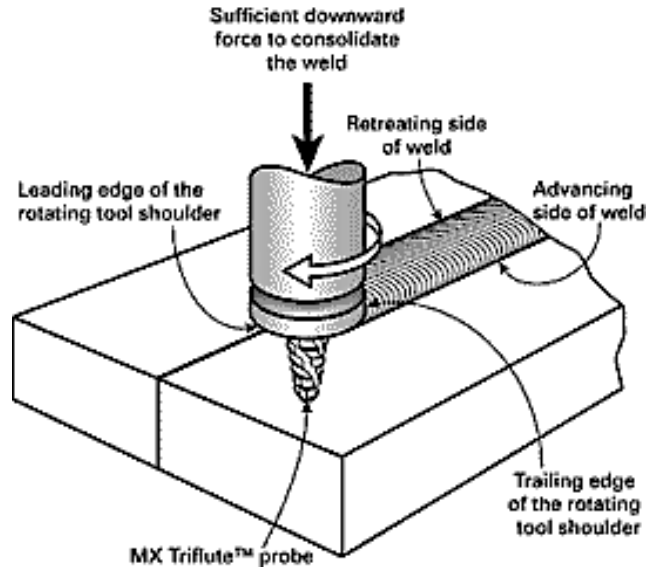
Principles of friction stir welding (Thomas, Johnson, & Wiesner, 2003)
